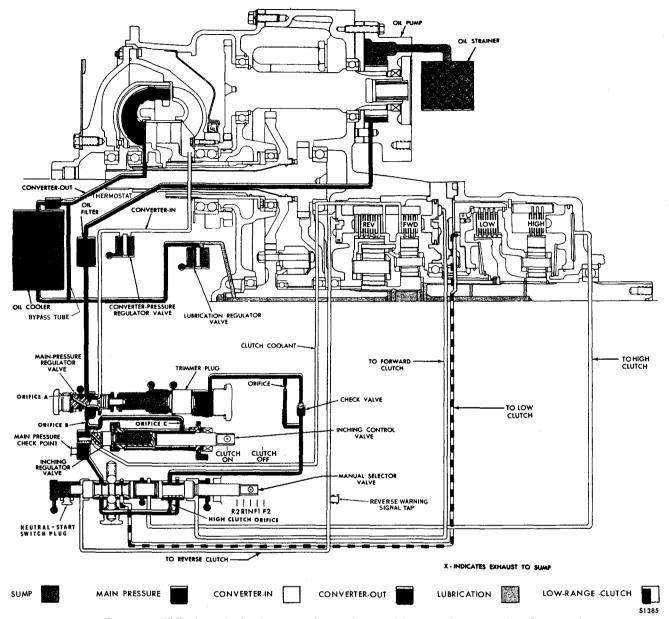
TRT 2221-3 hydraulic system for overdrive model with inching control—schematic view
